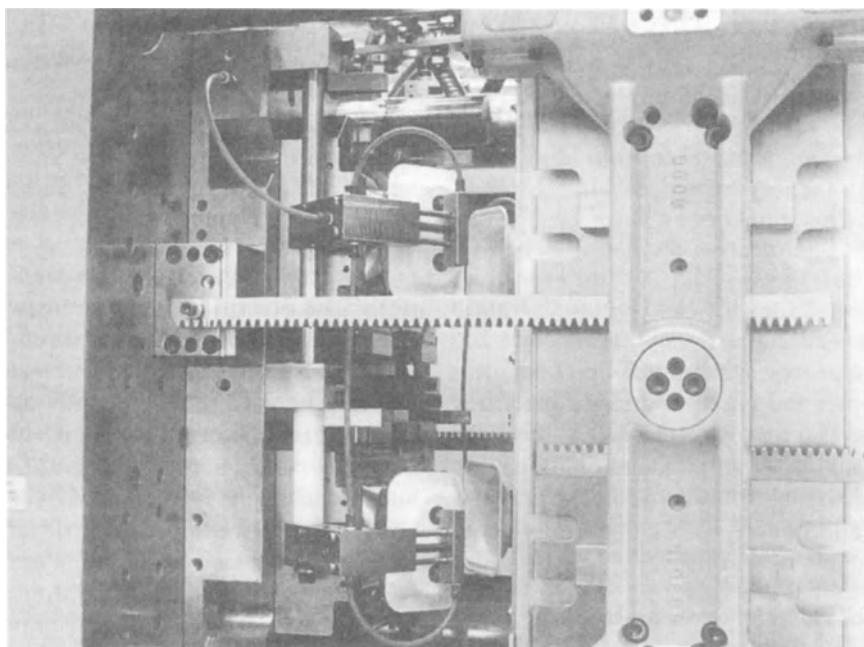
Patented mold-mounted swing chutes (Husky) for the removal of molded products from both single-face and stacked molds.
